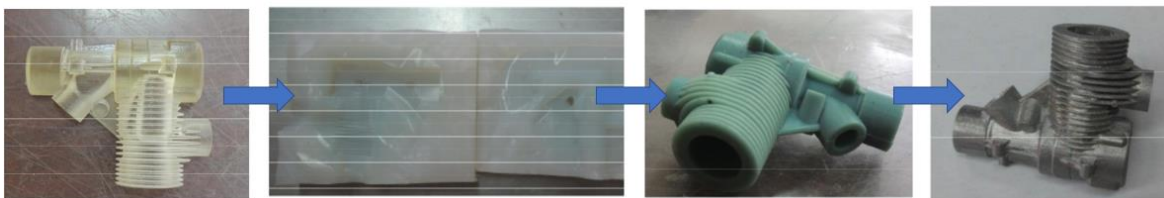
Using AM in an investment casting process, from left to right: AM master crankcase, silicon mold, wax crankcase, and aluminum cast crankcase [23]
